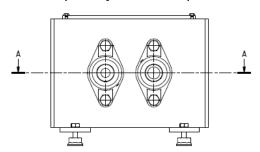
3D model of the dedicated gearbox module with a gear ratio of 1.42 – side view
